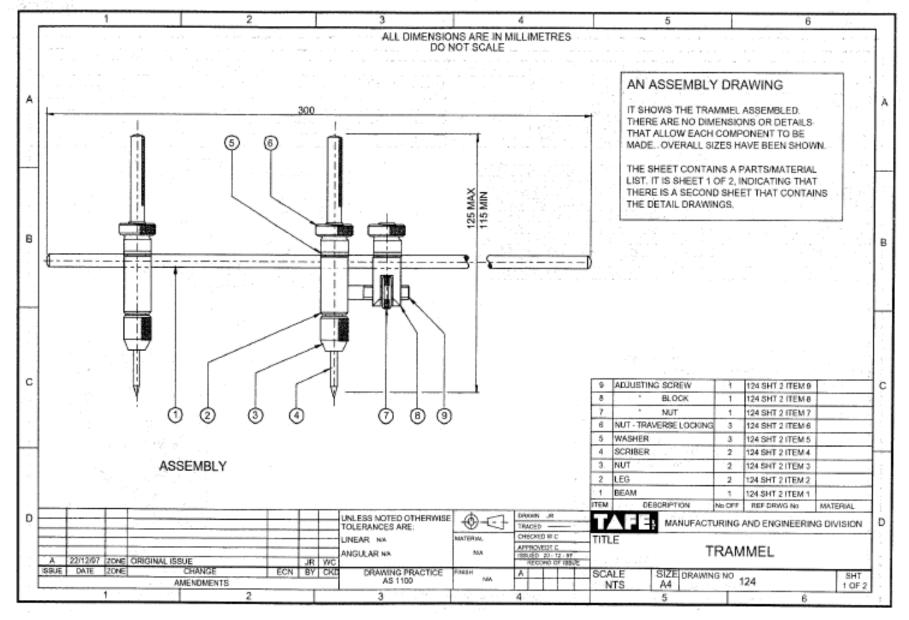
### DETAIL AND ASSEMBLY DRAWINGS ASSEMBLY DRAWINGS
